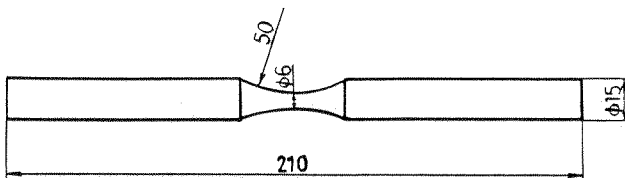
Shape and dimension of rotating bending fatigue test specimen.
